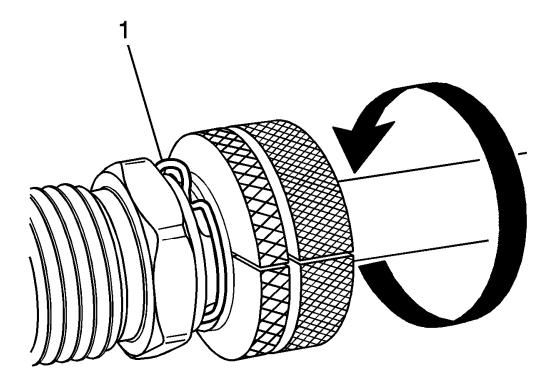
Quick-Connect On Coolant Pipe Courtesy of GENERAL MOTORS COMPANY
